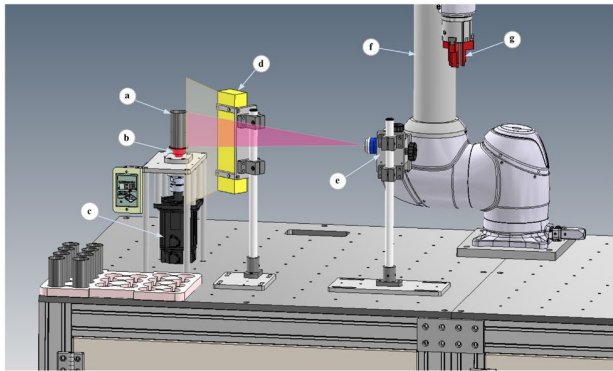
3D demonstration of the SMHSI hardware system for image acquisition and surface inspection. a – servo motor housing product, b – spin zig, c – motion motor unit, d – LED bar-light, e – line-scan camera, f – robot arm, g – gripper.
